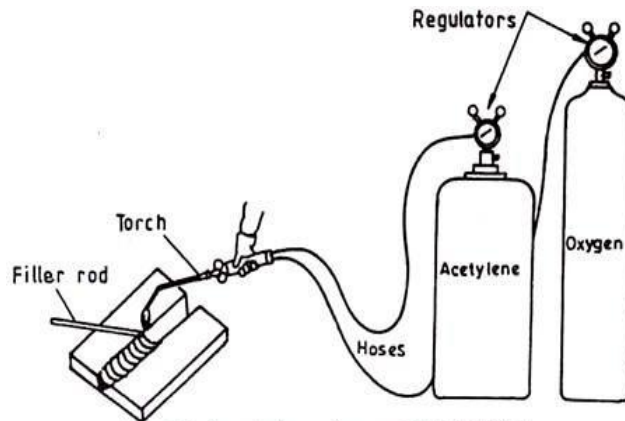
A standard setup for oxy-acetylene welding.
